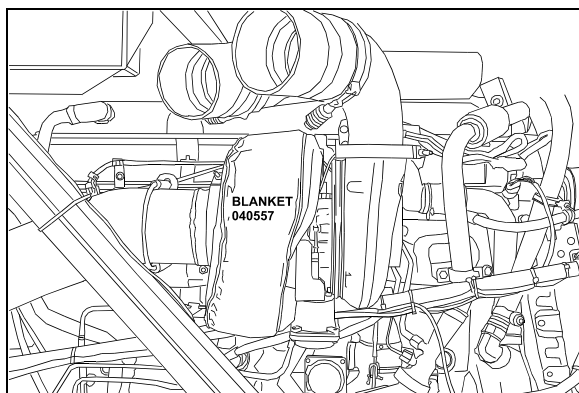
TURBO BLANKET INSTALLATION 04010
